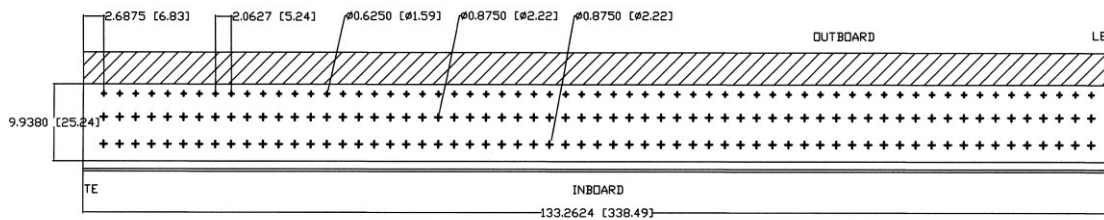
Side-of-Body Joint General Arrangement, Plan View. All Dimensions are in inches [cm].
